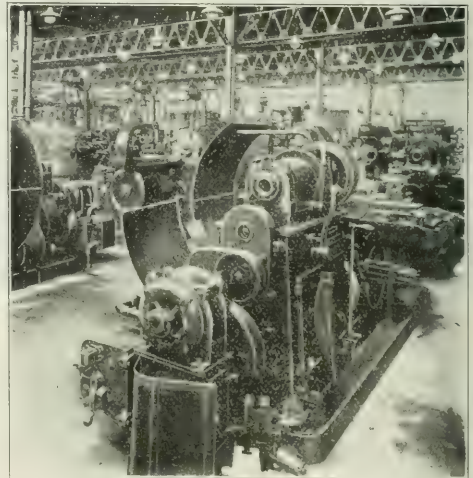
AUTOMATIC LATHES DIRECTLY DRIVEN BY MOTORS.
